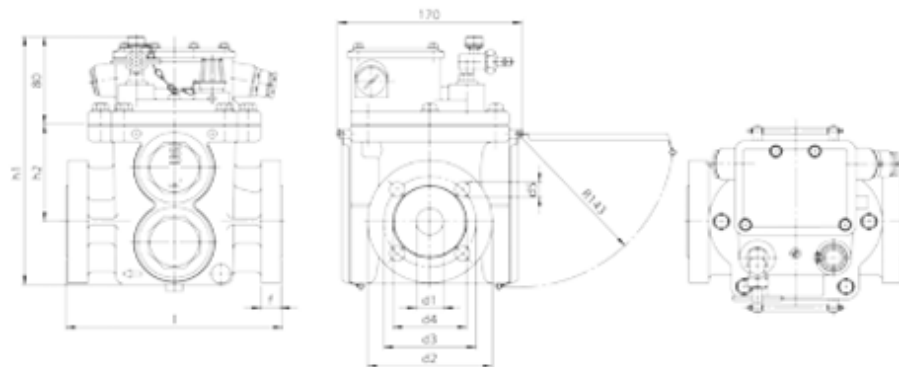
Dimensional drawing, type 05, 06, 07, 08, 09, 24
